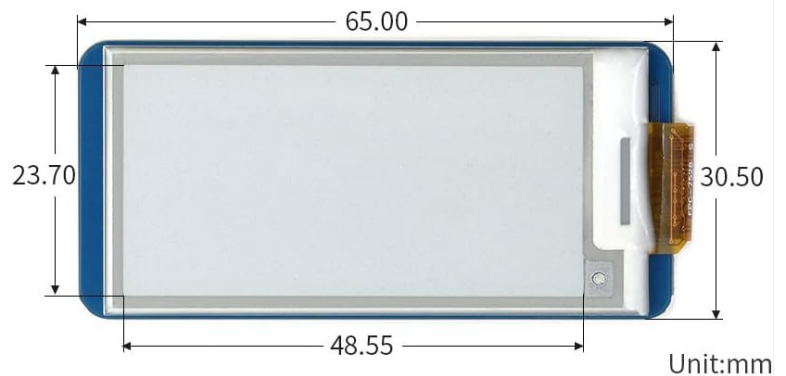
Outline dimensions of the 2.13-inch E-Paper module in millimeters.
